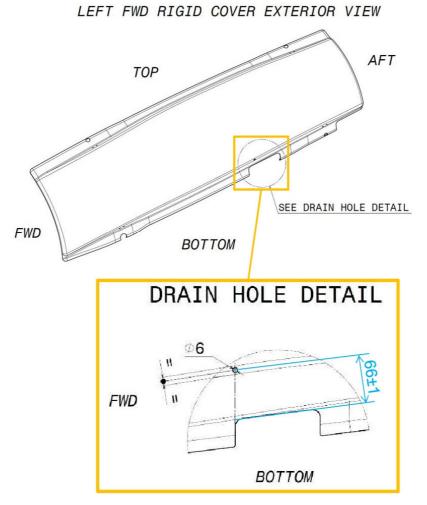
L/H FWD rigid cover exterior view and drain hole detail, drawing extract
